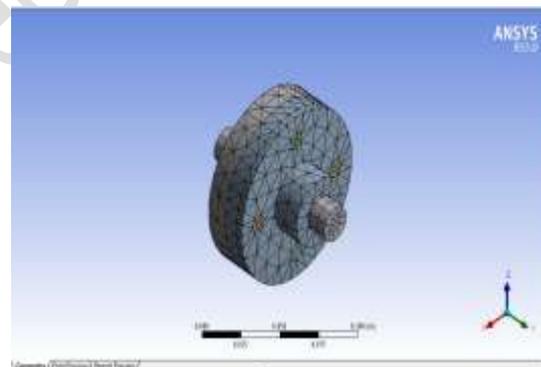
STEEL STATIC STRUCTURAL FLANGE COUPLING MESHING MODEL
